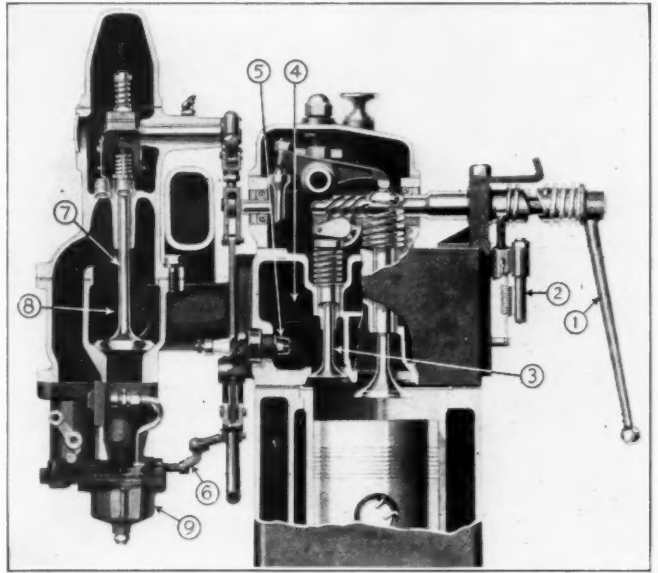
Engine is designed for gasoline starting. The engine is switched to gasoline starting by turning crank (1). This opens valves (3) to the auxiliary combustion chambers (4). Spark plugs (5) are located in the auxiliary chambers. Crank (1) also closes butterfly valve (6) shutting off direct air inlet and opens valve (7) permitting intake manifold (8) to contact gasoline carburetor (9). A high tension magneto supplying current to the spark plugs is also engaged. After the engine has made a pre-determined number of revolutions, rod (2) releases the shaft turned by lever (1) automatically changing the engine to Diesel operation.
